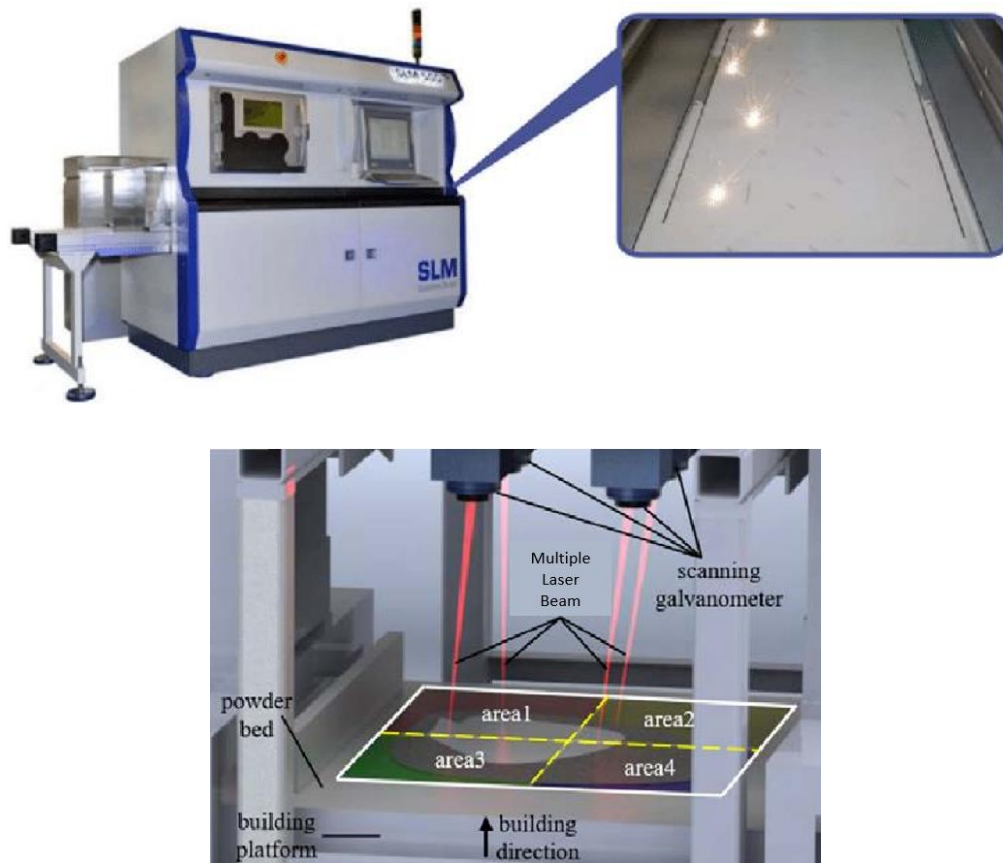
SLM 500HL machine multi-laser technology and schematic of the multi laser system (from [57] and [58])
